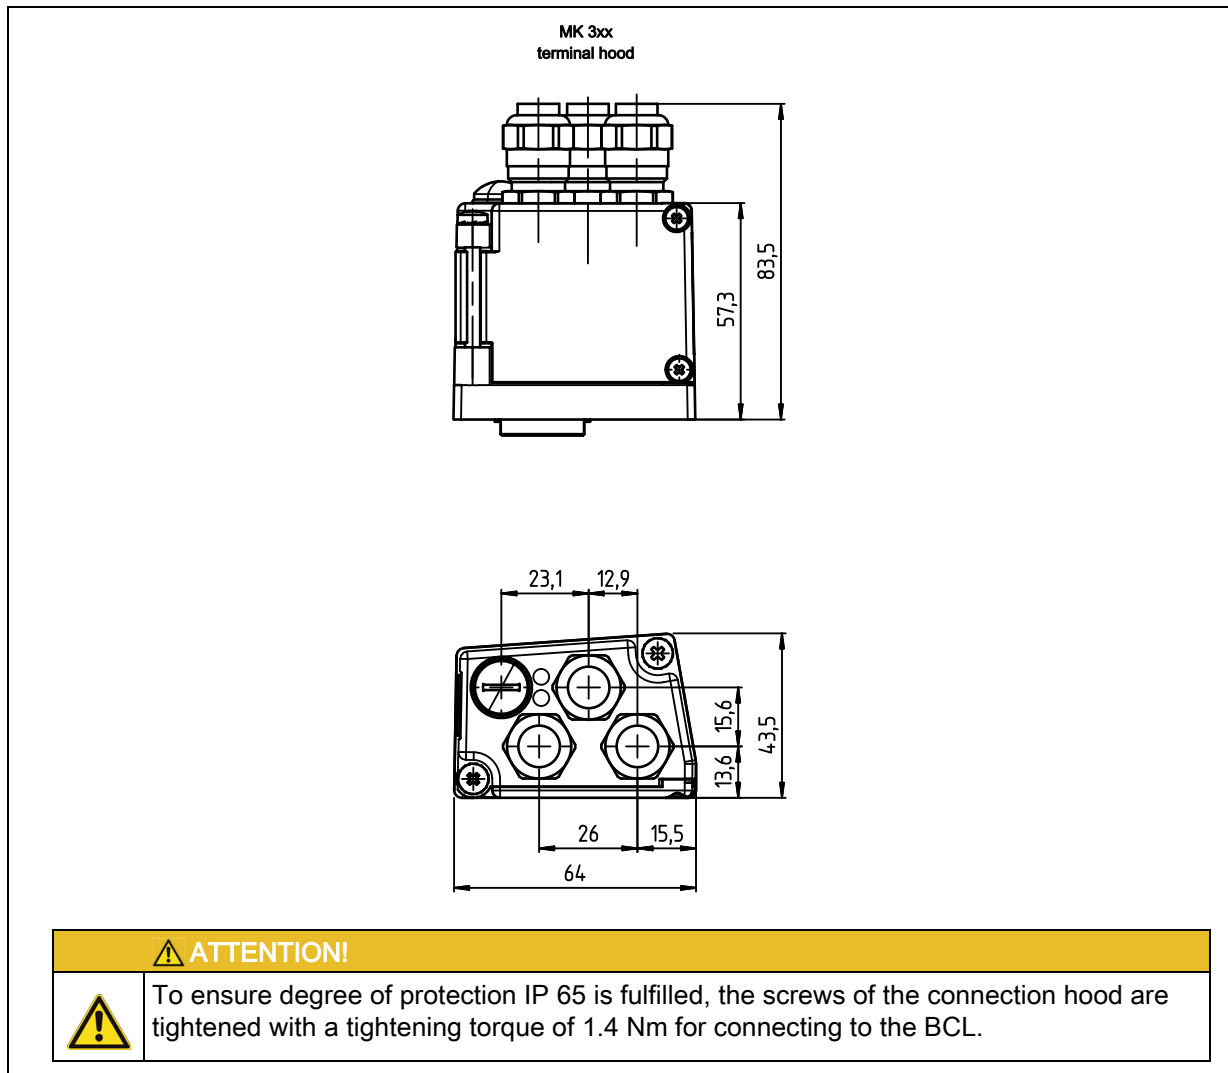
Dimensioned drawing of MK 3xx terminal hood
